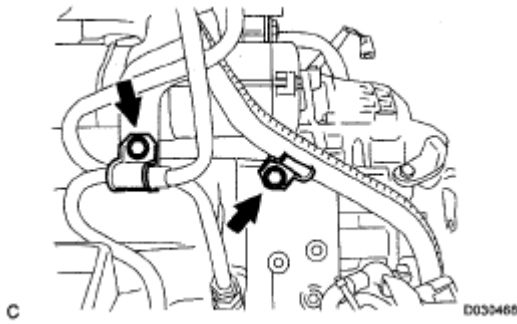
Locating Oil Filler Tube Clamp Bolts
